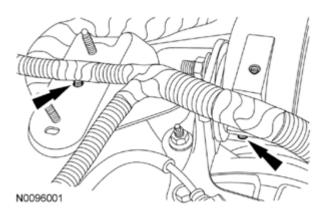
Locating Negative Battery Cable Pin-Type Retainers Courtesy of FORD MOTOR CO.
